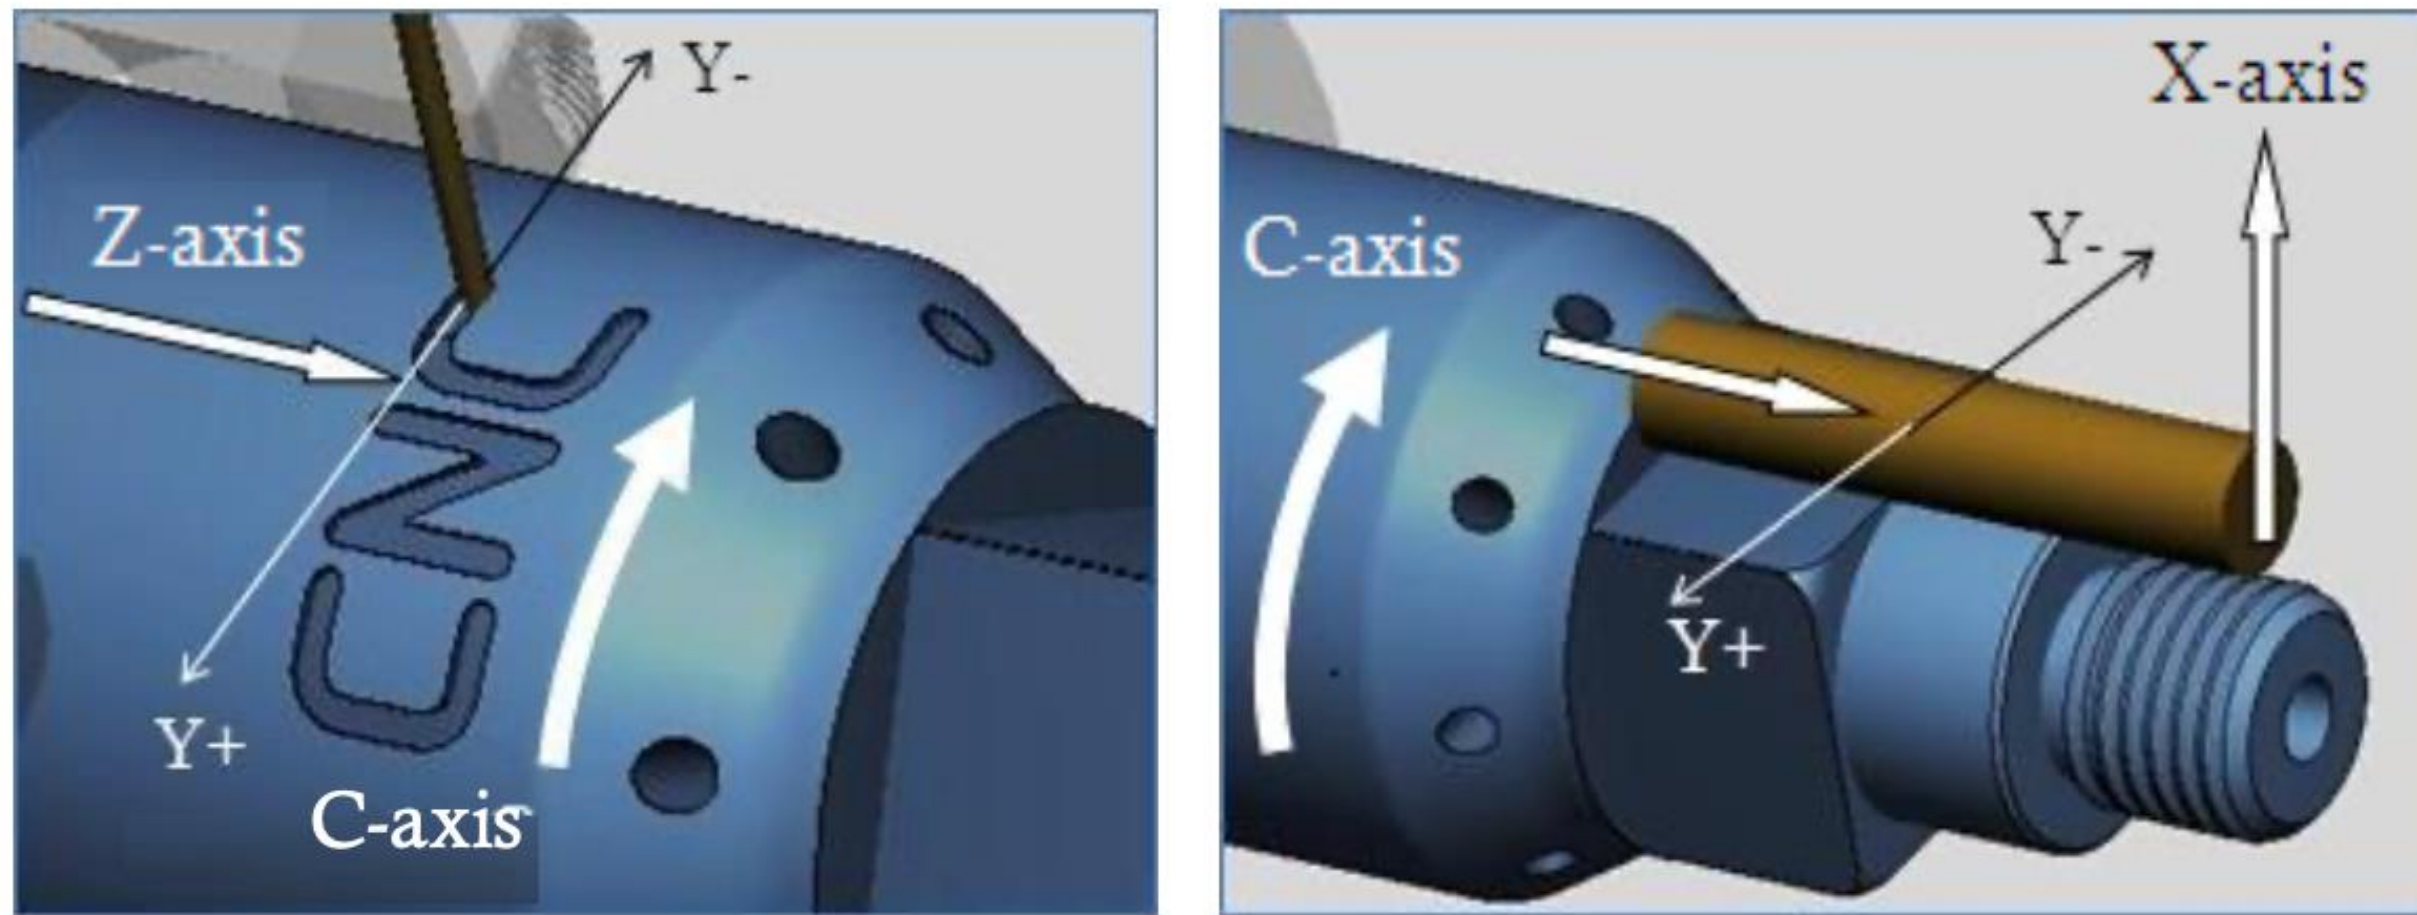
C-axis positive programming direction and real movement of the workpiece
